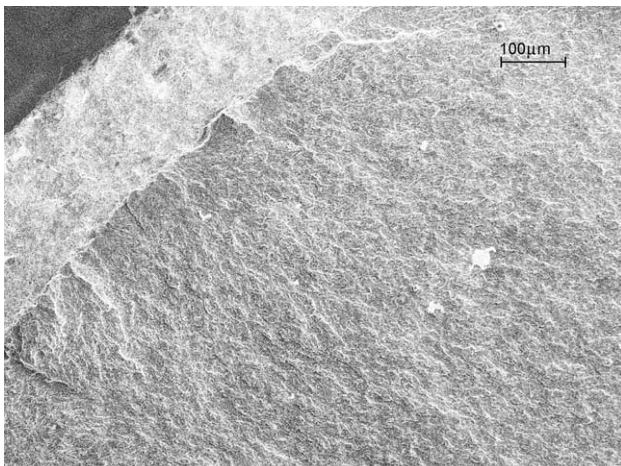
Fracture surface from specimen coated with WC–10Co–4Cr, 200 $\times$ .
